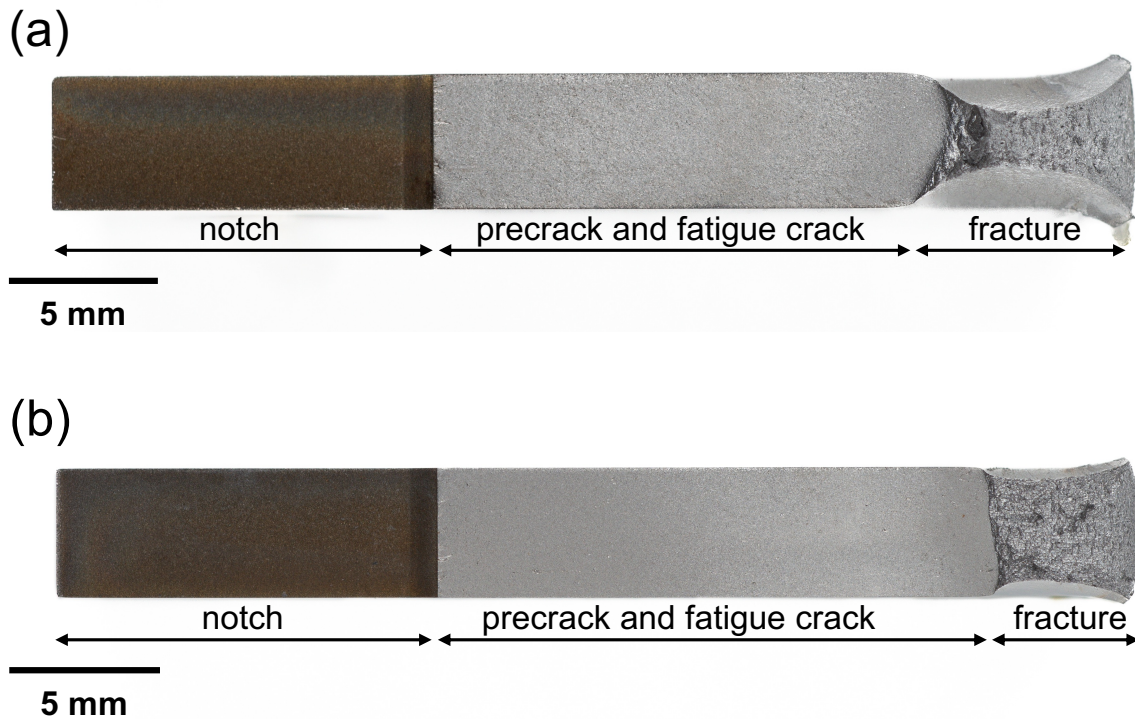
Surfaces of (a) Wrought 4 and (b) PBF-S-B (H) specimens including EDM notch, fatigue crack (and precrack), and fracture.
